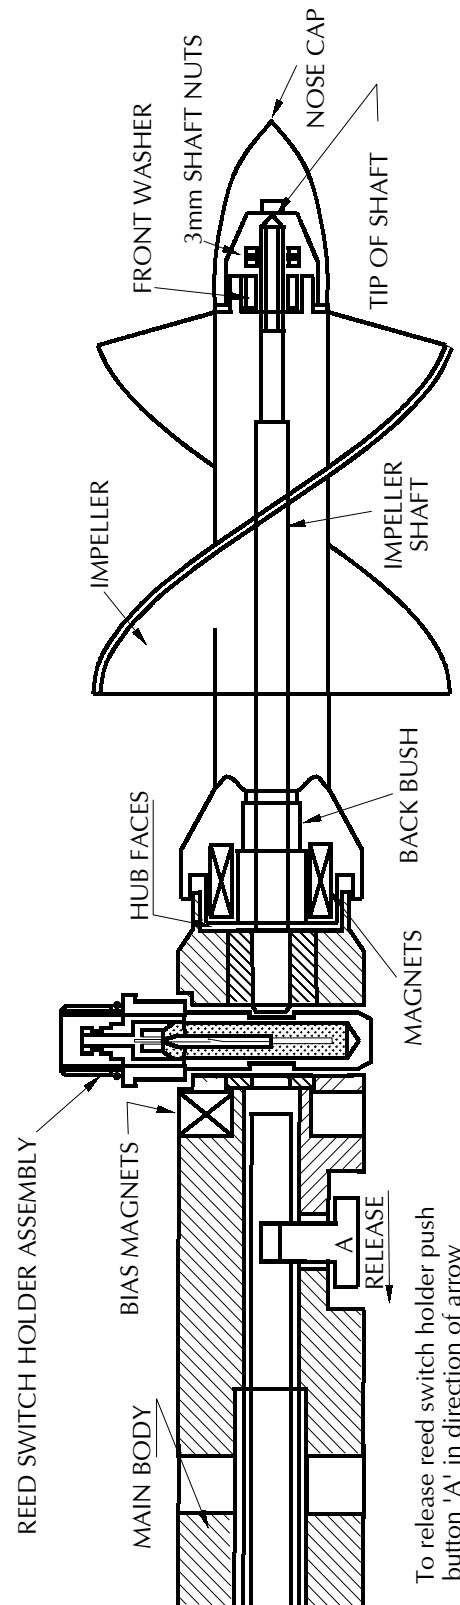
BFM002 IMPELLER SHAFT SETTING
